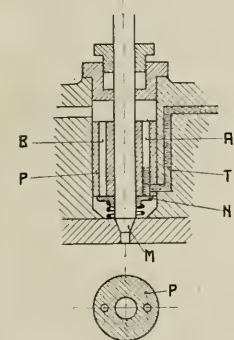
DIESEL-ENGINE FUEL-INJECTION VALVE OF THE LEOBERSDORF MACHINE CO. (GERMANY)
